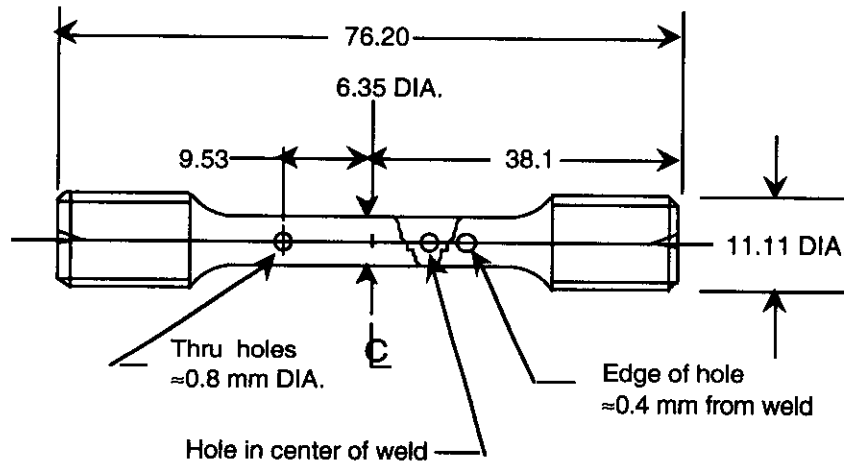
Weld specimen fabricated from gas-metal-arc welded plate of Type 316L SS with matching filler metal. Crevices formed by inserting tight-fitting SS pins into the holes.
